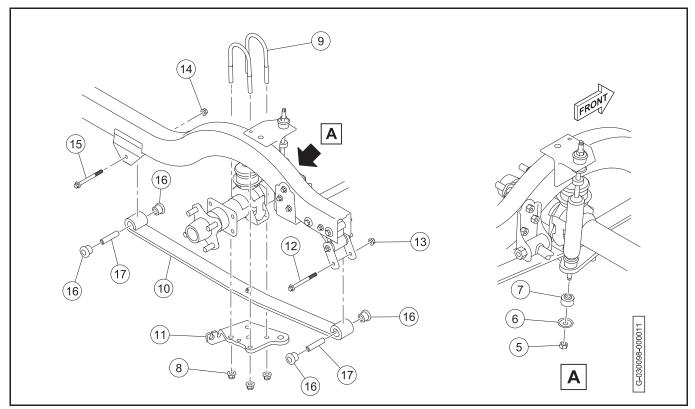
Leaf Spring Removal (Four-Passenger - Heavy Duty With Panhard)
